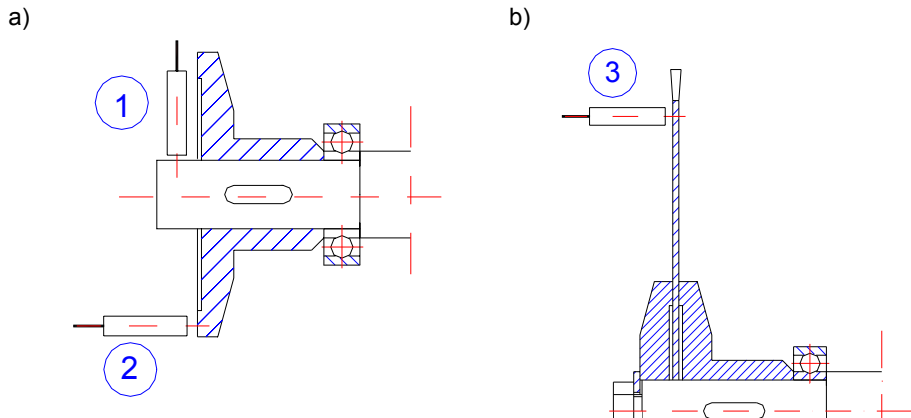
Positions of the eddy – current displacement probe on a circular sawing machine during examination of: a) 1 – spindle radial run-out, 2 – collar axial run-out, b) saw blade axial run-out
